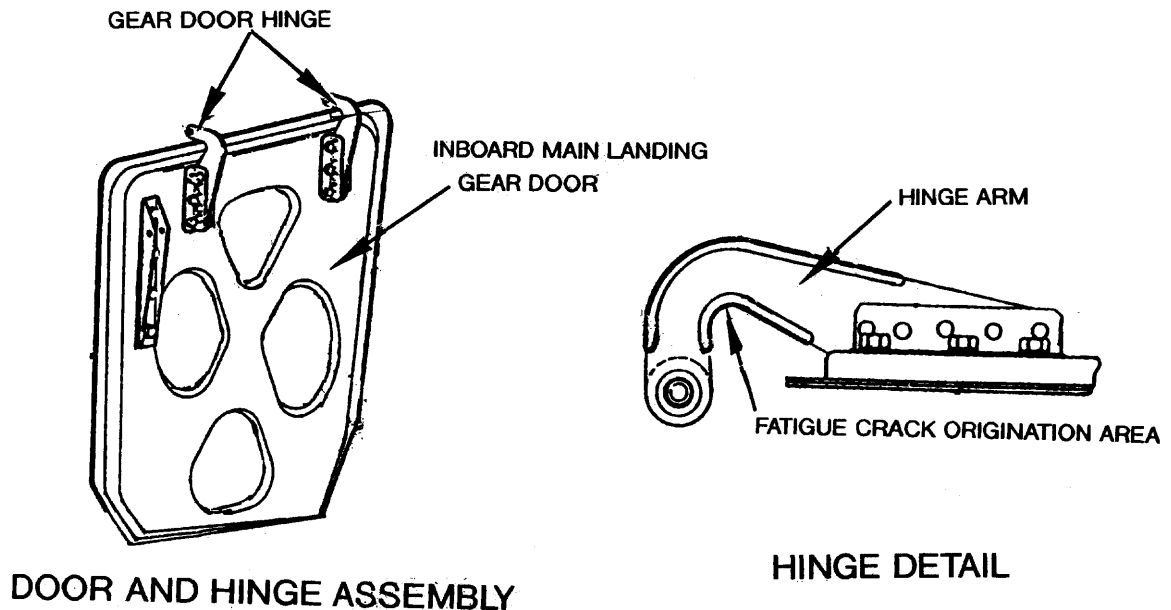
Piper PA-31 Main Landing Gear Door Assembly
